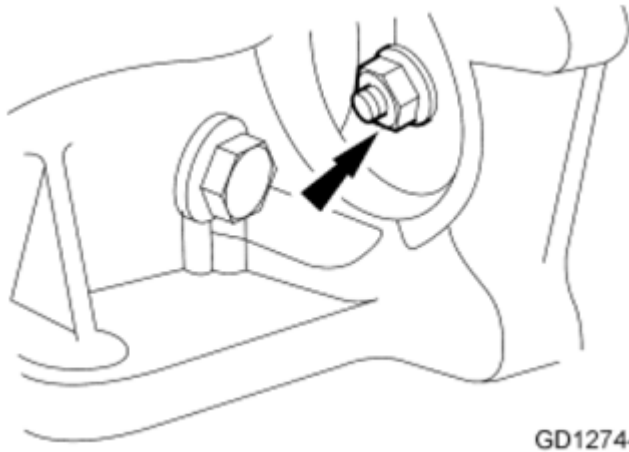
Locating Torque Converter-To-Flexplate Nut
